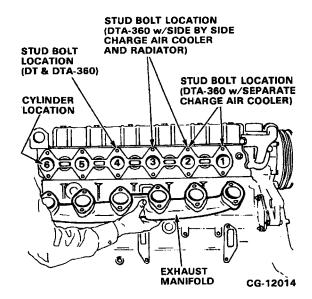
Exhaust Manifold Removal (One-Piece Manifold Shown)
